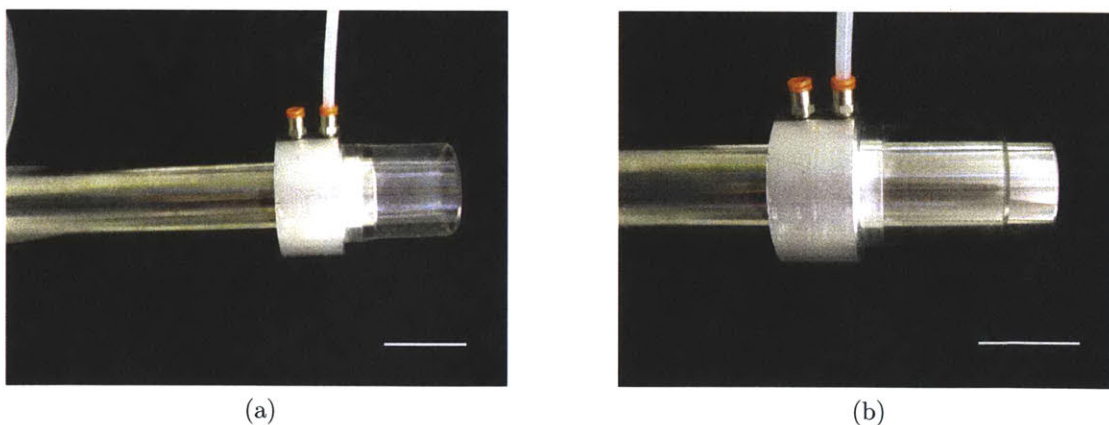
Cylindrical stamps are mounted to rolls using an air cushion. (a) The stamp is connected to a bushing that supplies compressed air between the roll and stamp. (b) The air creates a fluid bearing and prevents the stamp and roll from contacting, allowing the stamp to slide onto the roll in a stress-free state. Releasing the air pressure allows the stamp to collapse against the roll, where it remains fixed by the large work of adhesion between the two surfaces. Scale bars: 5 cm.
